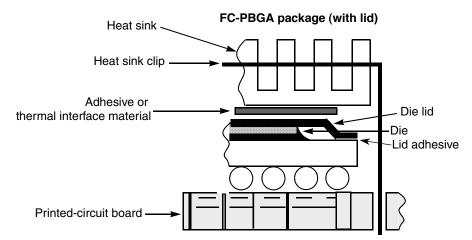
Package exploded, cross-sectional view—FC-PBGA (with lid)
